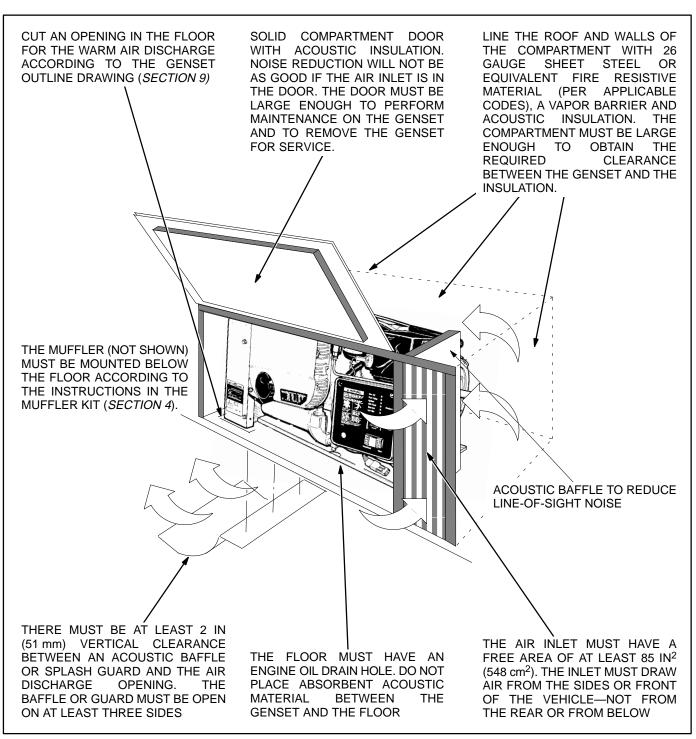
TYPICAL GENSET MOUNTING INSIDE THE CAB OR WORK-SPACE ENVELOPE
